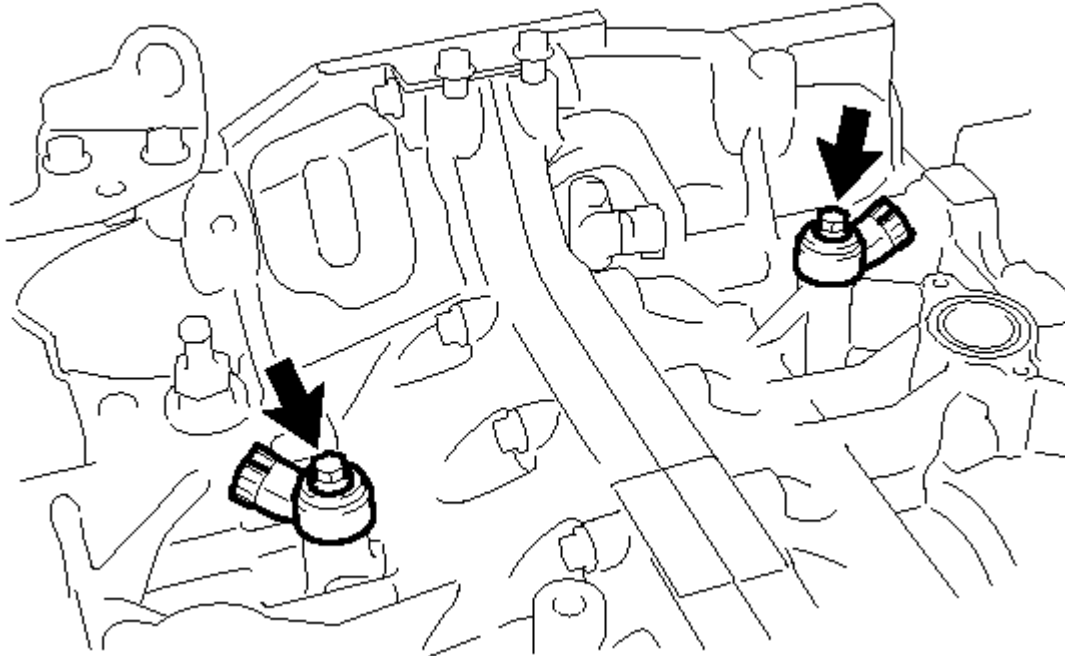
E.F.I. Engine Coolant Temperature Sensor
